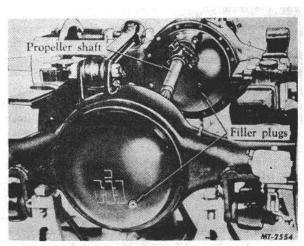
Rear View of Tandem Axle Showing Installation of Rear Propeller Shaft.
